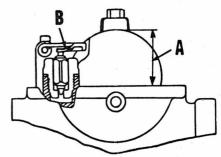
Float level (A) should be 21-24MM and is adjusted by bending tang (B). Float bowl gasket should be removed when checking.
